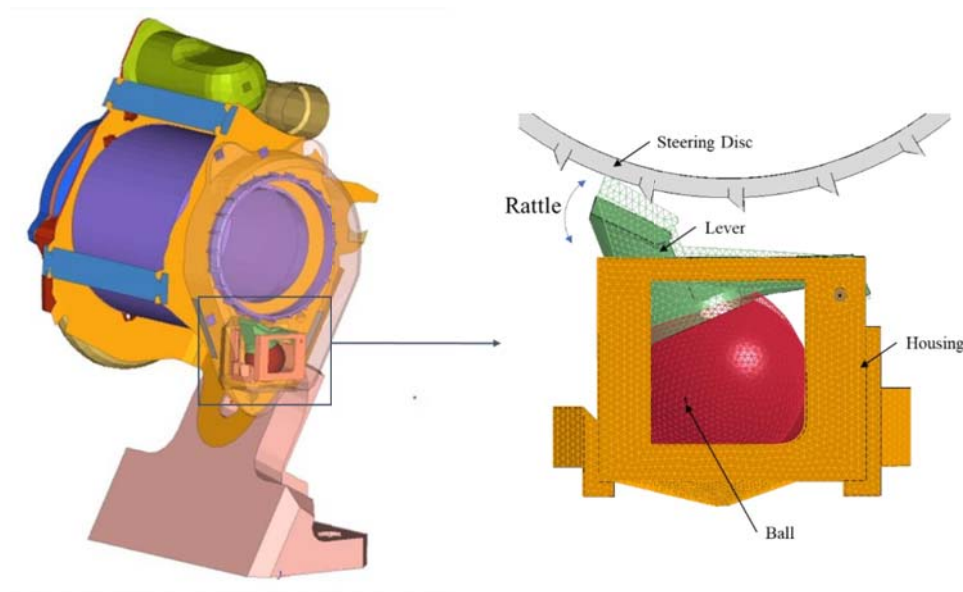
Vibrating seatbelt retractor model and rattling car sensor assembly
